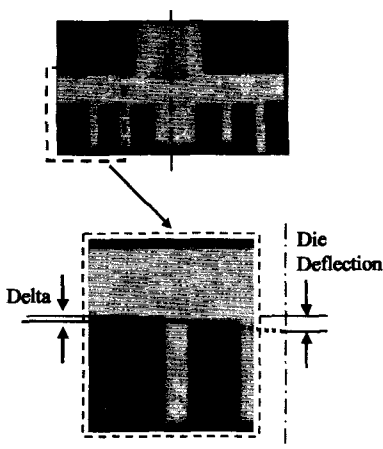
The section of scroll rotating part manufactured by conventional hot forging
